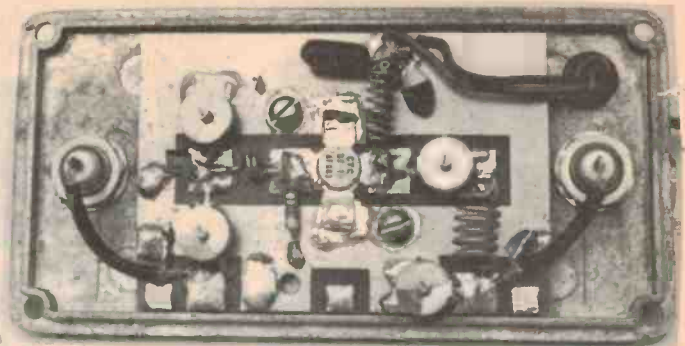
Construction and component layout of the ETI-715D 3W two metre amp.
